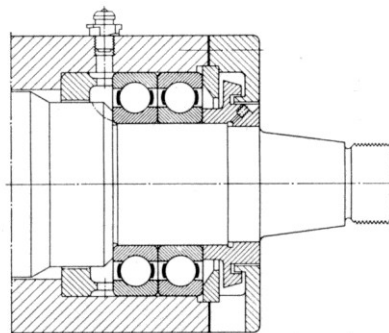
Grease escape valve for high-speed grinding spindle bearing arrangement
